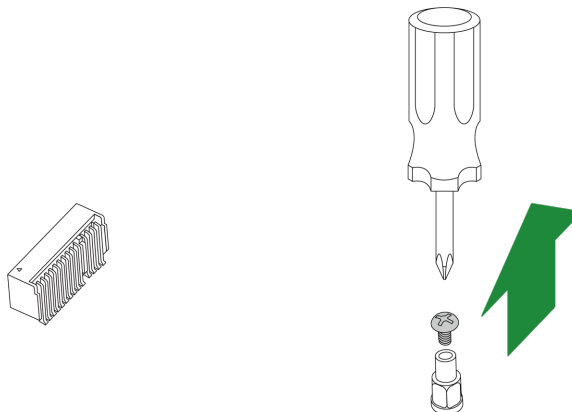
Removing the Screw on the Pre-Installed Standoff
